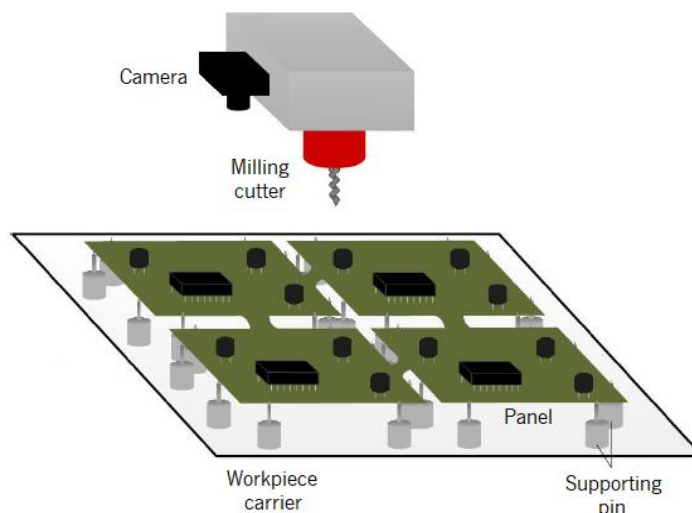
Milling machine work scheme<sup>[43]</sup>
